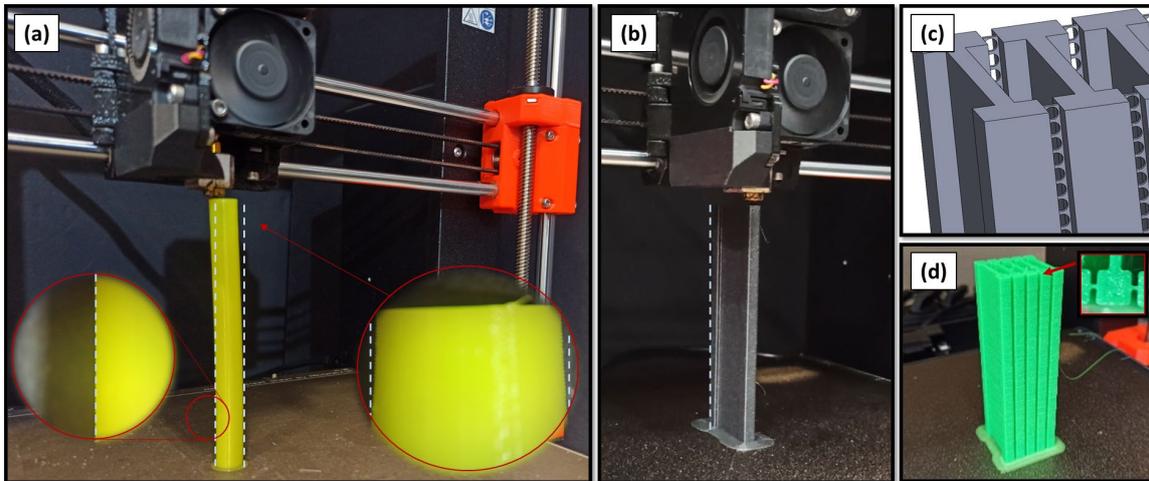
Examples of the instability while printing tall and slender structures: (a) Tower of Smartfil TPU 93A with differences in geometrical accuracy caused by wobbling; (b) Test specimen of Flexfill TPU 98A; (c) CAD model of the very thin sacrificial grid connecting specimens; (d) Five connected specimens of Flexfill TPU 92A.
